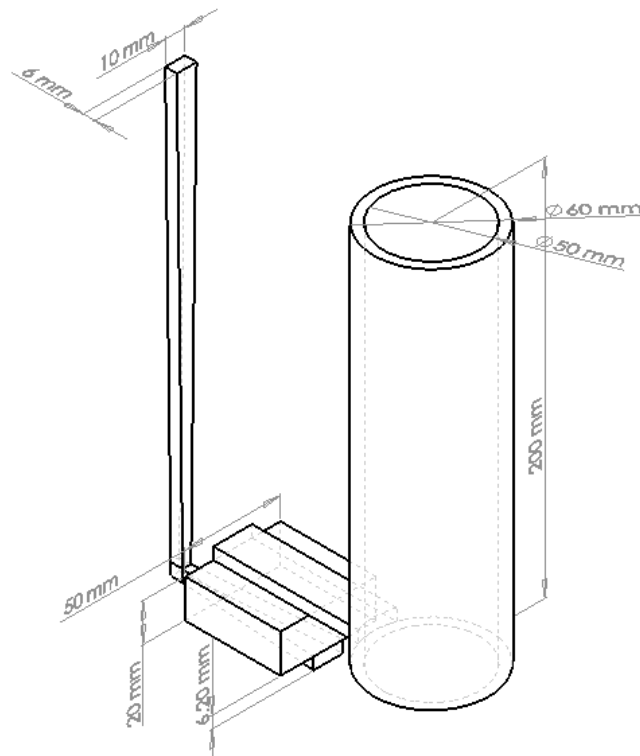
An isometric view showing the geometry and dimensions of the second low melting point alloy casting where a filter was used. Filter dimensions were 50x50x20 mm.
